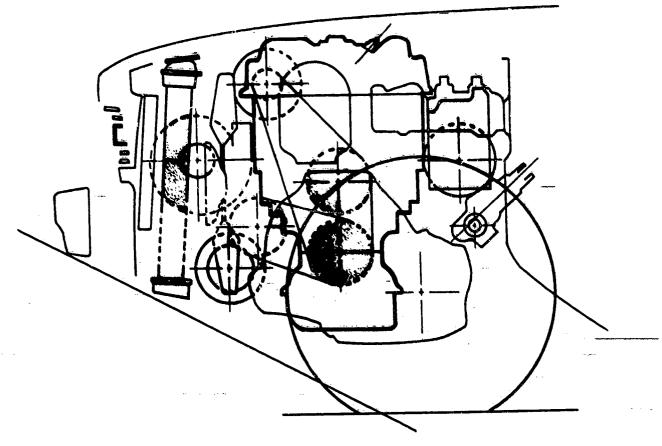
Packaging of the Ford 4-98 Engine in a 1976 Pinto, Front Wheel Drive:
